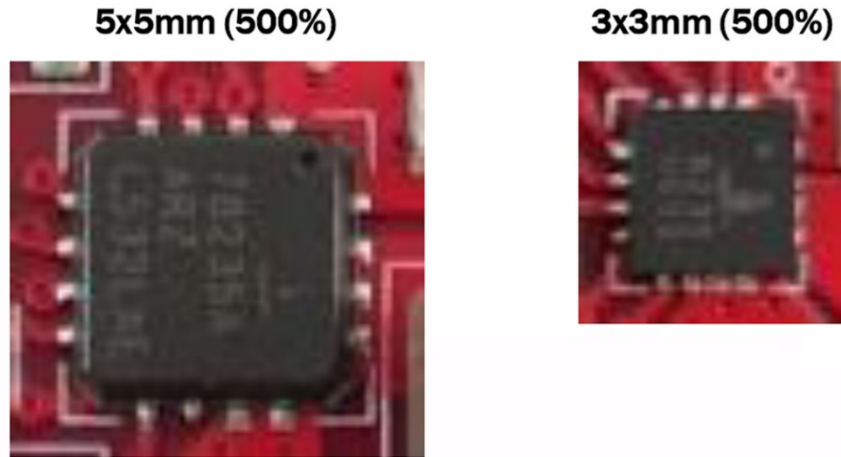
Magnification shows more prominent solder joints on the ISL78235 5x5mm WFQFN, compared with the QFN version
